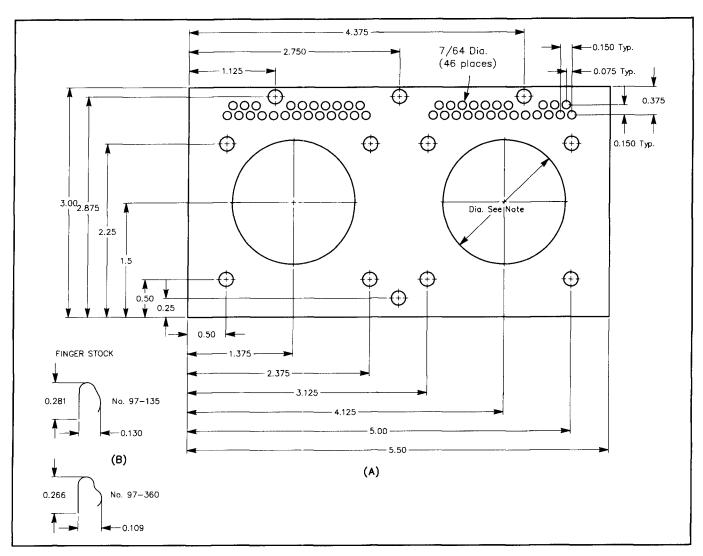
Alternate grid-collet mounting plate for use with finger stock (A); dimensions of the two usable Instrument Specialties finger stocks. The mounting plate is made from 0.062-in. brass or copper, silver plated if desired. The diameter of the large holes depends on the grid-contact method used. For type 97-135 stock, the diameter is 1.600 in.; for 97-360 stock, 1.540 in.; for EIMAC 882931 collet, 1.500 in.
